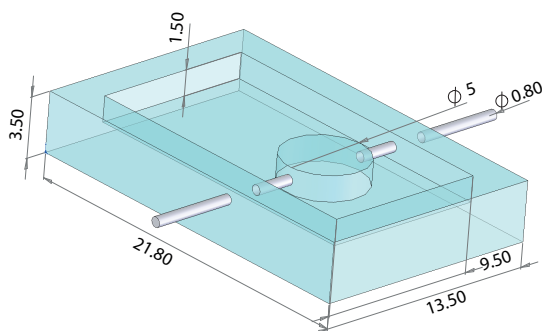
Milled master in PMMA for the PDMS chamber. All the dimensions are in mm.
